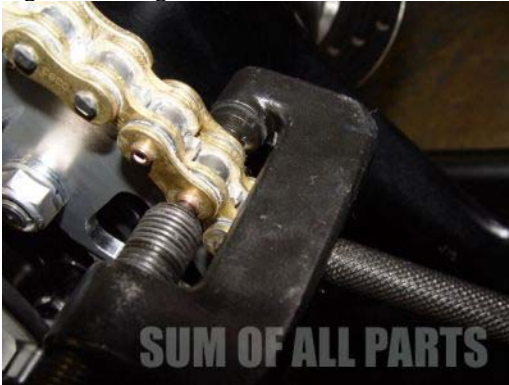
alternating rivets between rotations- use the RIVET MAKER to flare out the rivets. When you observe light cracks in the rivet- they are set properly and you are done. Always follow the tool kit instructions for connecting the links.
